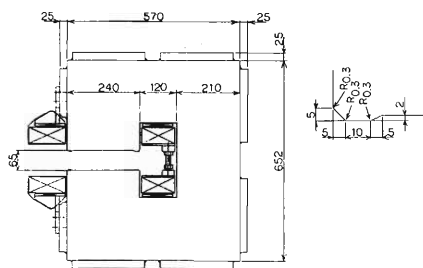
Cross-sectional view of a prototype dipole magnet.
